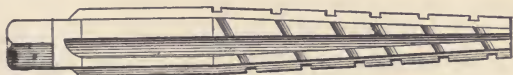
SCREW REAMER FOR BOILER WORKS.
